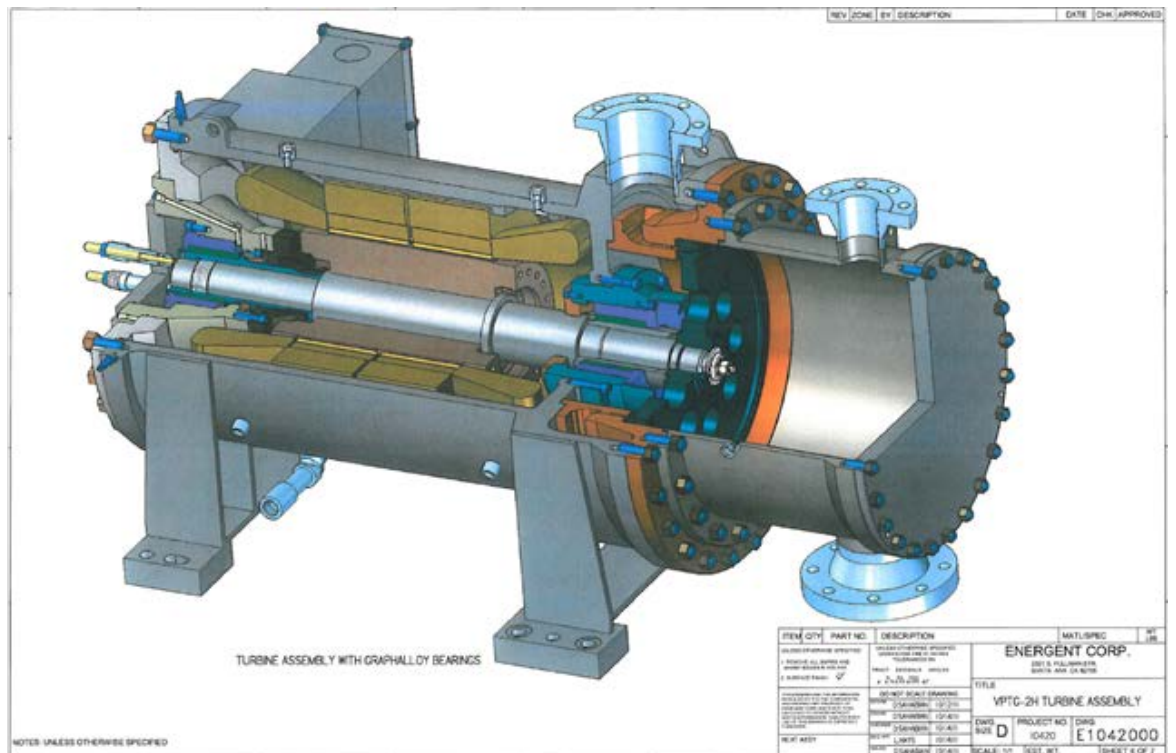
A section view of design of the hermetic sealed 200 kW turbine.
